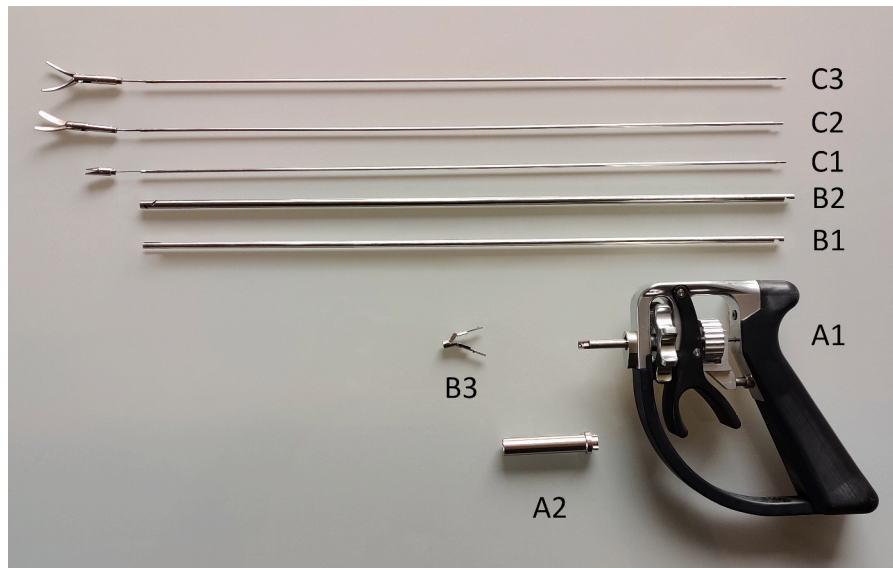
The device completely disassembled. A1: Handle, A2: Shaft Busing, B1: Middle Shaft, B2: Outer Shaft, B3: SATA-joint, C1/3: Push-pull rod with a clip applicator, cutter and grasper tip respectively.
